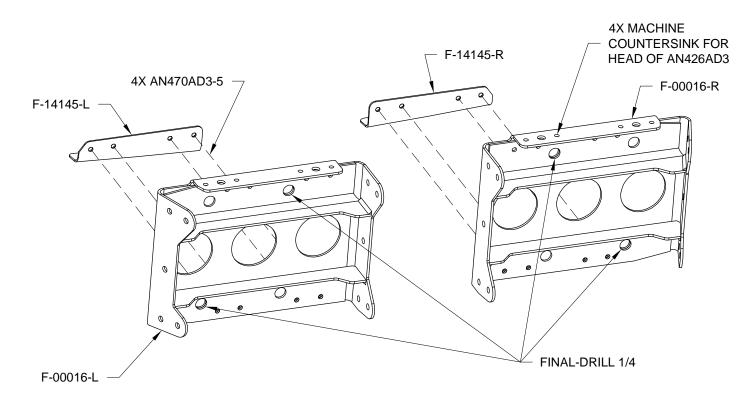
STEP ATTACH WELDMENTS
